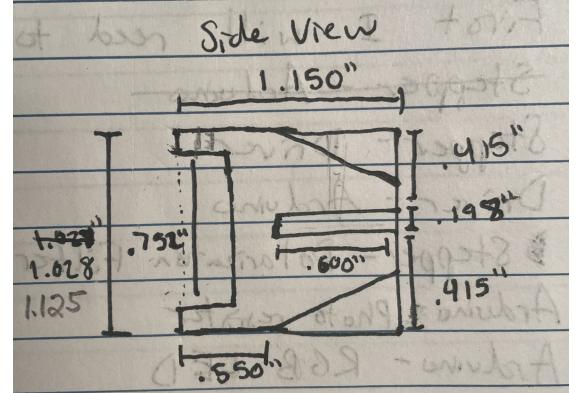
Sketch of Stepper Motor to Rotating Device Adapter
